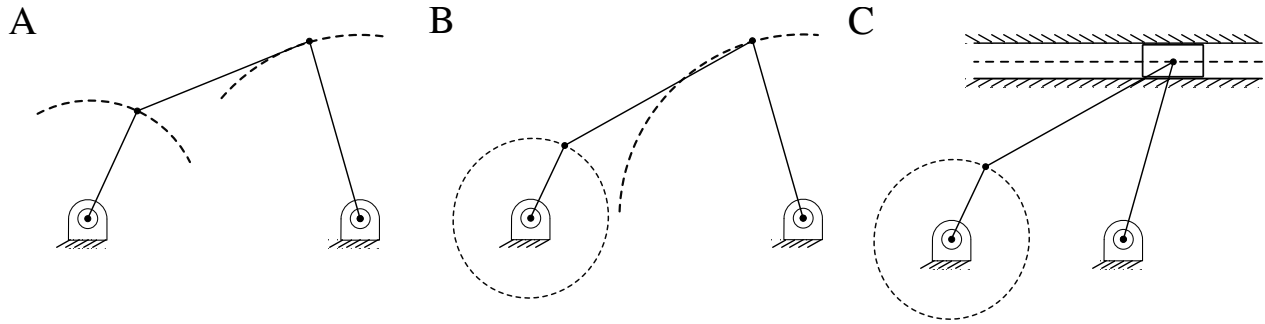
Basic configurations of the four-bar mechanism. A. Double rocker mechanism. B. Crank-rocker mechanism. C. Crank-slider mechanism.
